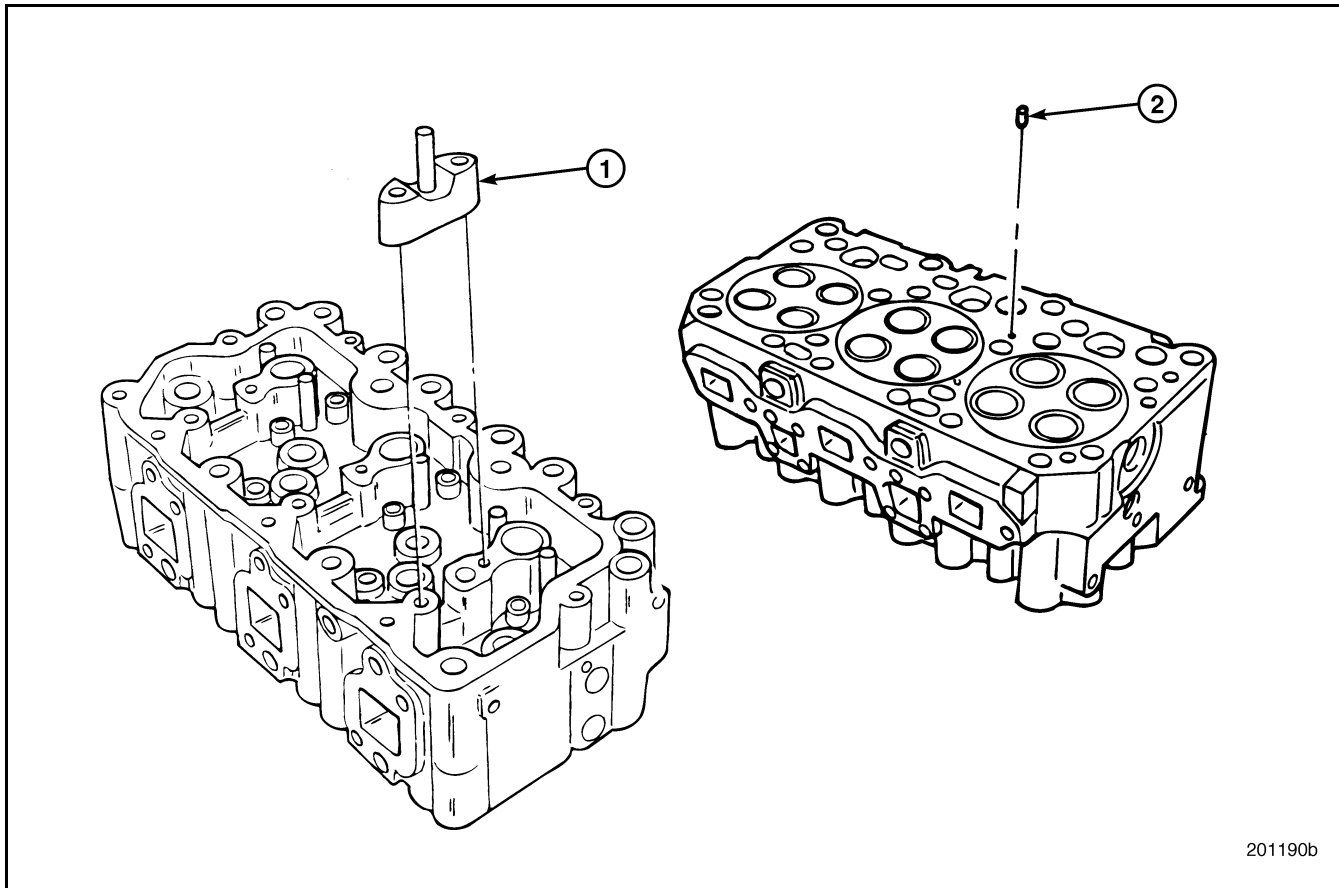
Cylinder Head Oil Passage Leak Check (Out of Chassis)
